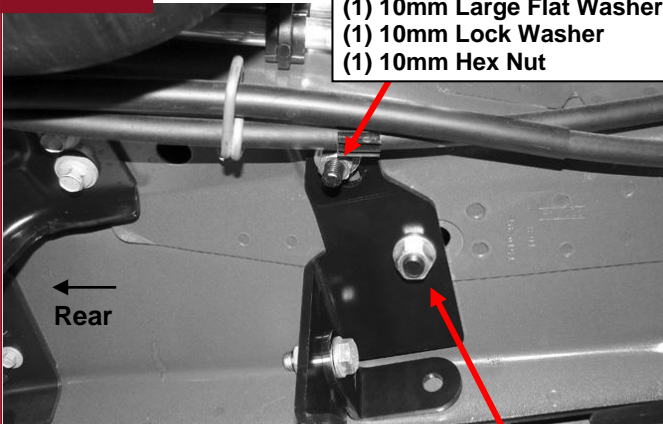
Insert the Bolt Plates into the holes on rear mounting location
